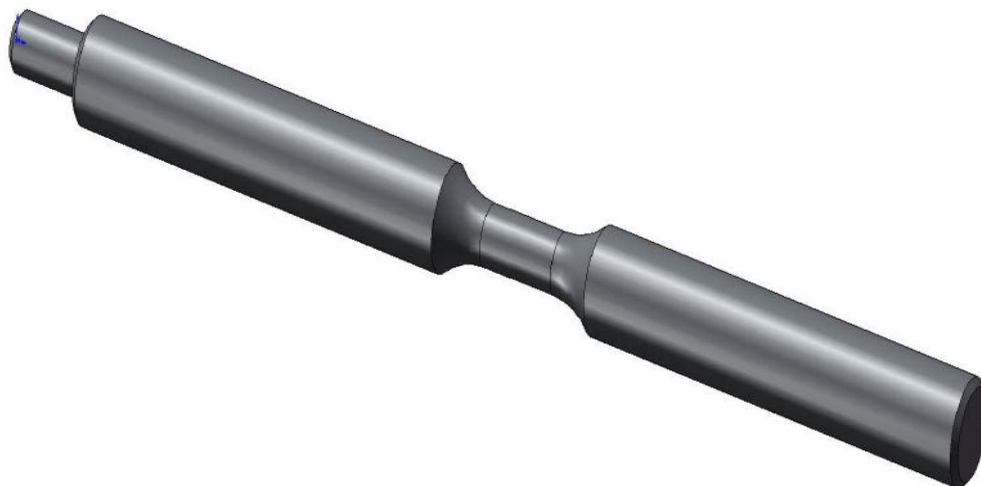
3D model of the specimen used in rotating bending fatigue test
